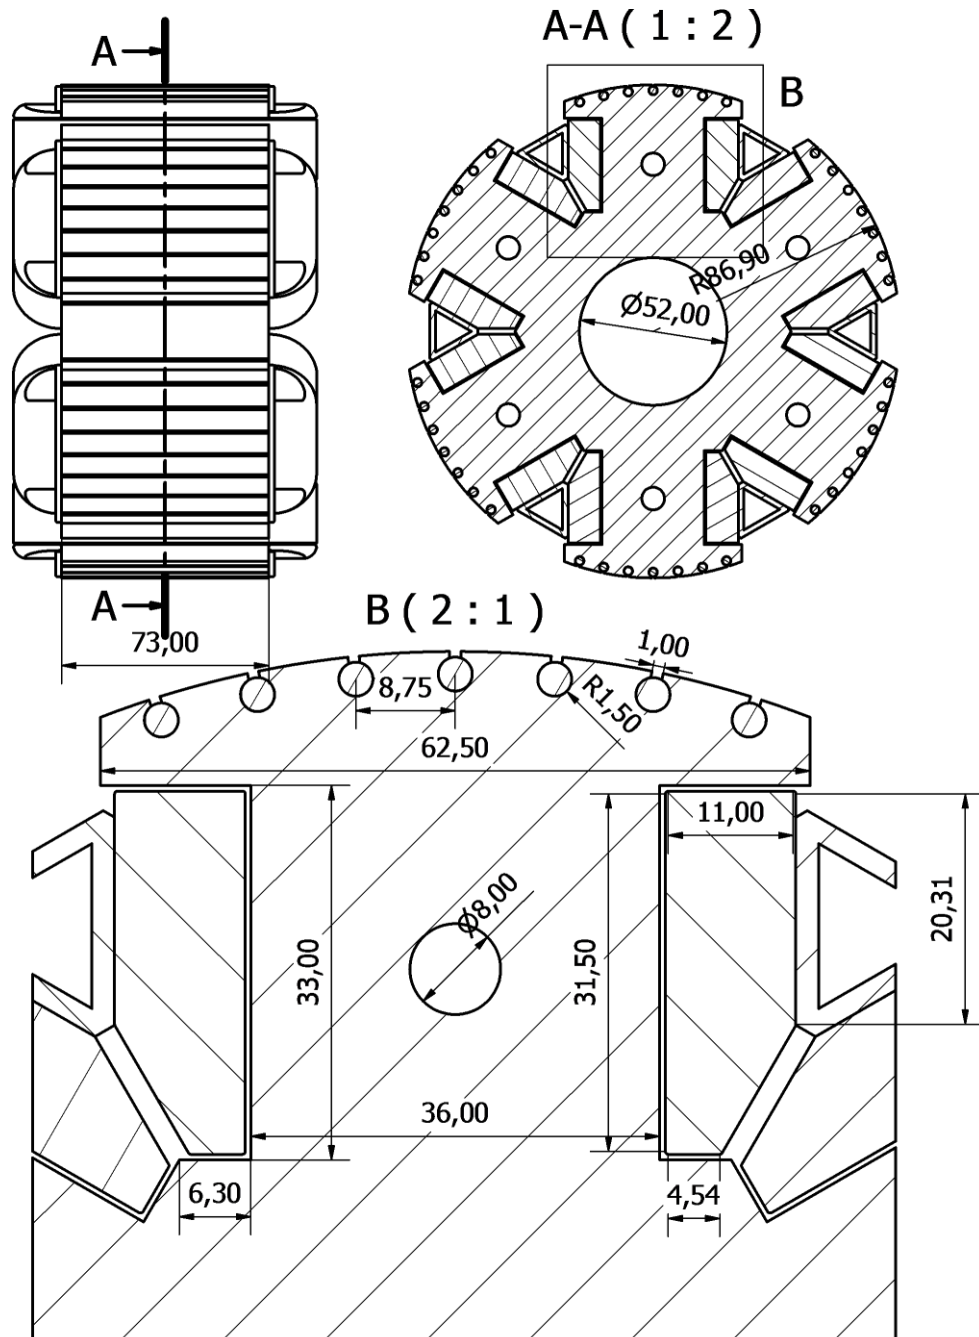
Commercial GT40PCz8 BSG main generator stage rotor dimensions
